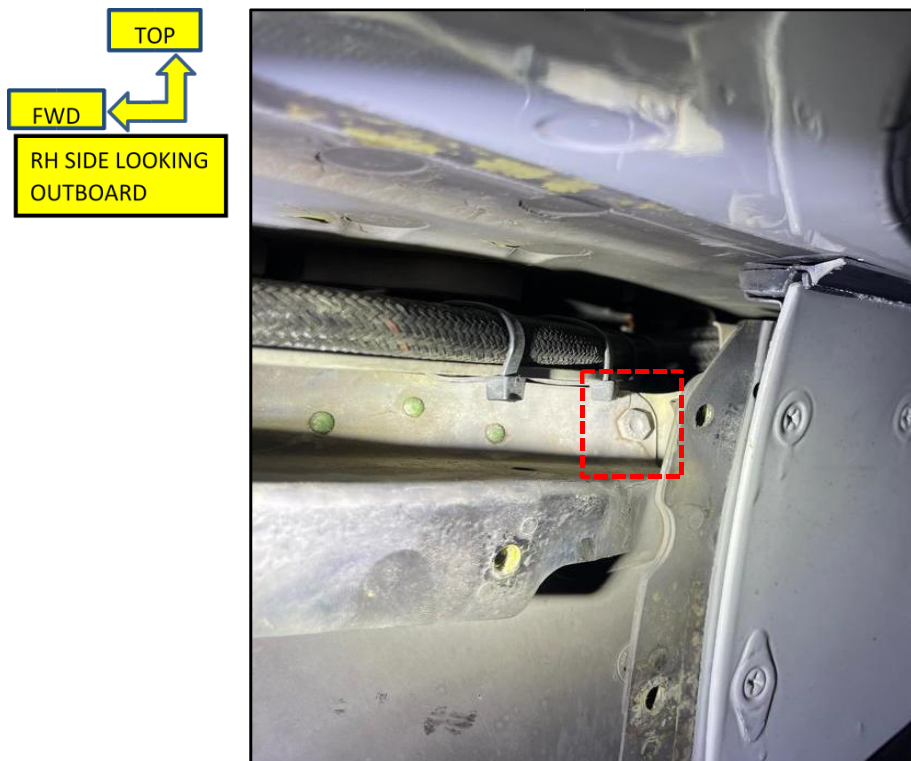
Crack found at Pylon Bracket inboard Engine No. 2
